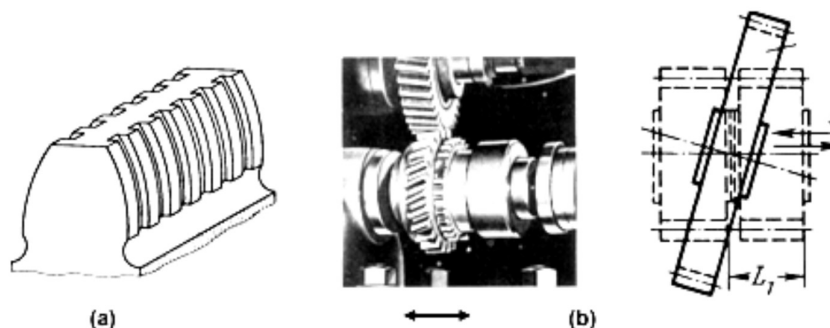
(a) Cutting teeth of gear shaving and (b) action
